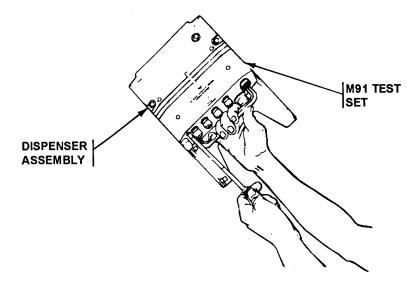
Connecting M91 Test Set to Dispenser Assembly.
